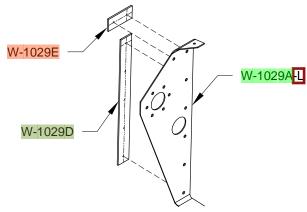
CUTTING AND MARKING THE W-1029E SPACER
